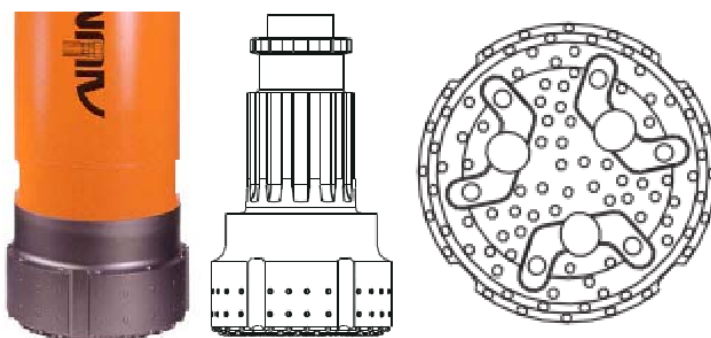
RC300 large diameter pneumatic reverse circulation drilling tool
